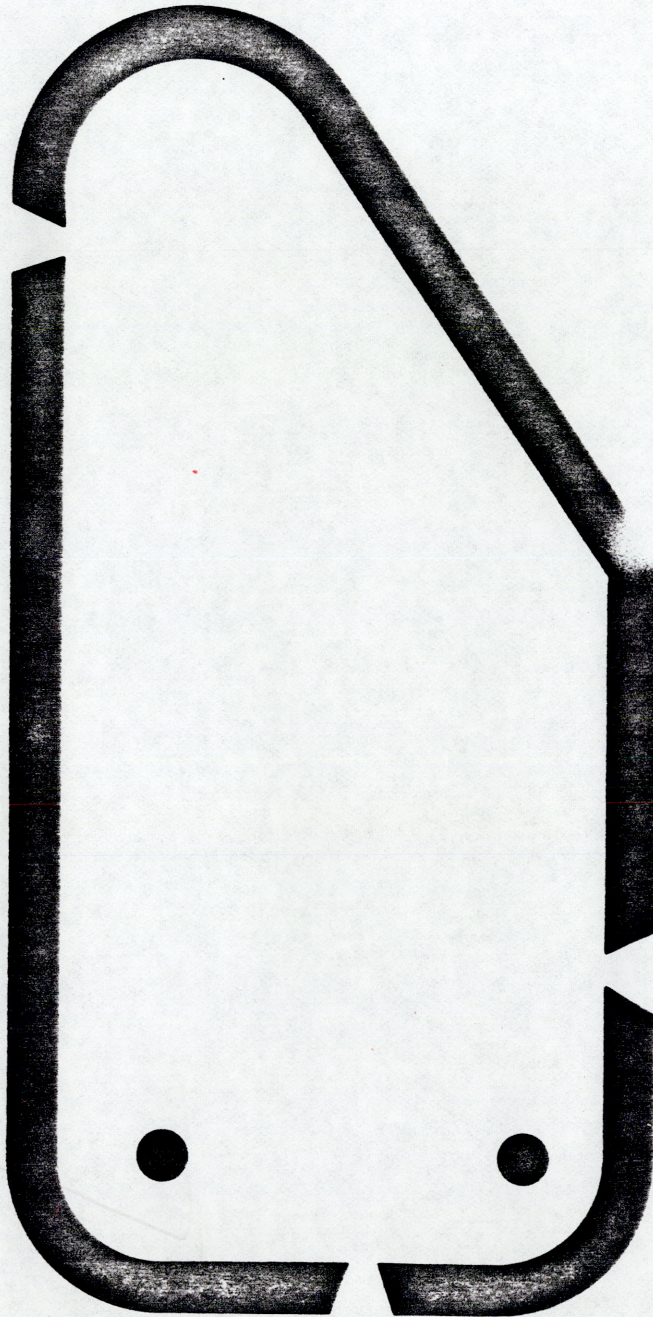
MAGNIFICATION OF A PHOTOTOOL FOR THE PRODUCTION OF CAMERA SHUTTER BLADES MADE FROM SPRING STEEL, COURTESY OF ALLEN ET AL.
